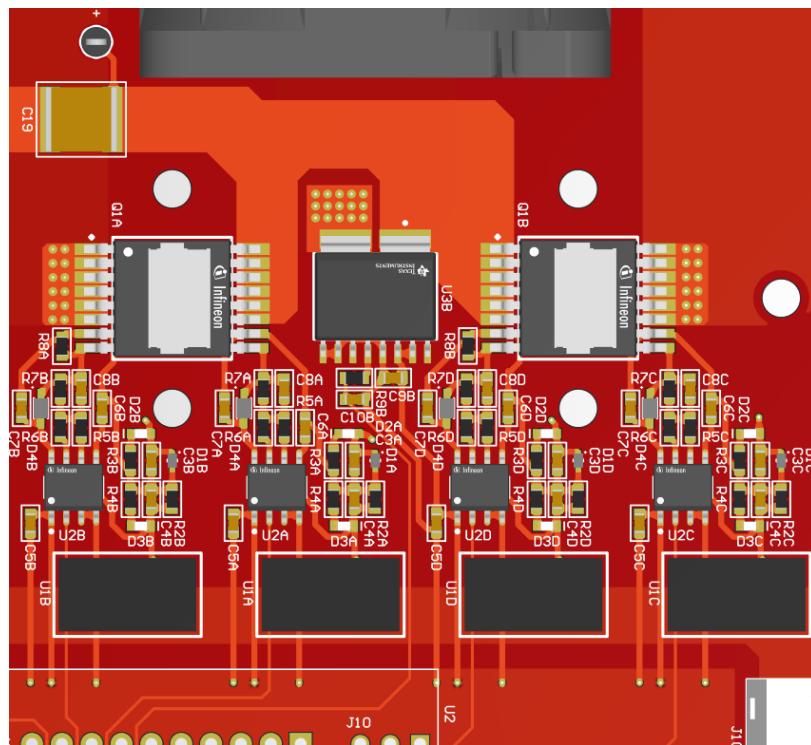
3D orthographic layout of a CSI leg (heatsink and DSP 3D bodies removed).
